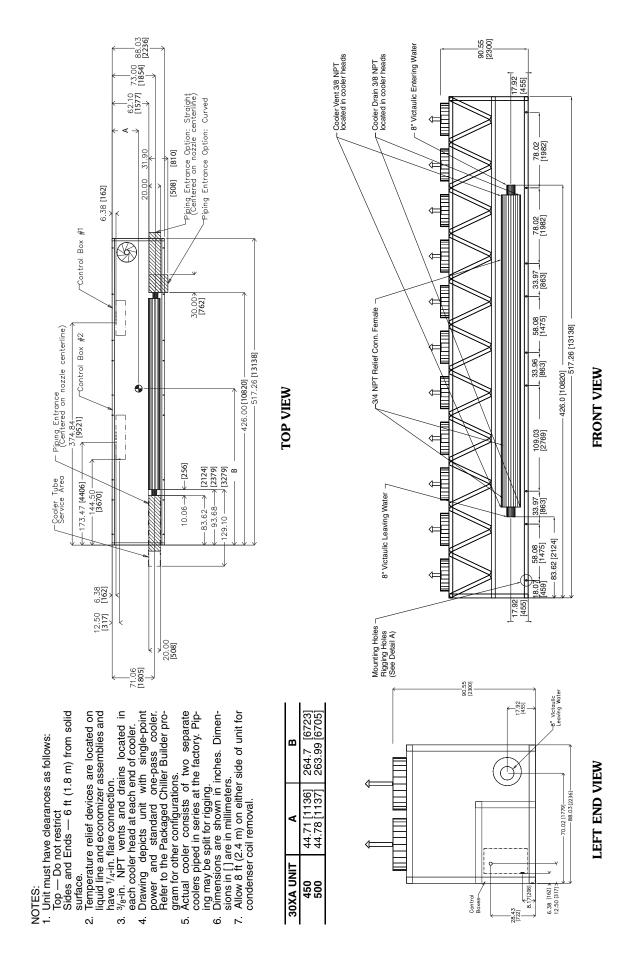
30XA450,500 Air-Cooled Liquid Chiller with Single Point Connections Dimensions
